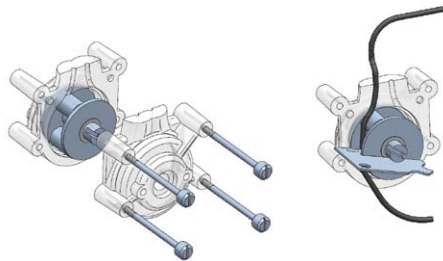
Pump Head Assembly (left) and Tubing Installation (right)
